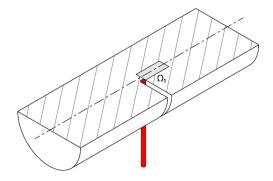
Schematic illustration of the specimen axial section (2 mm × 5 mm) for subsurface inspection.
